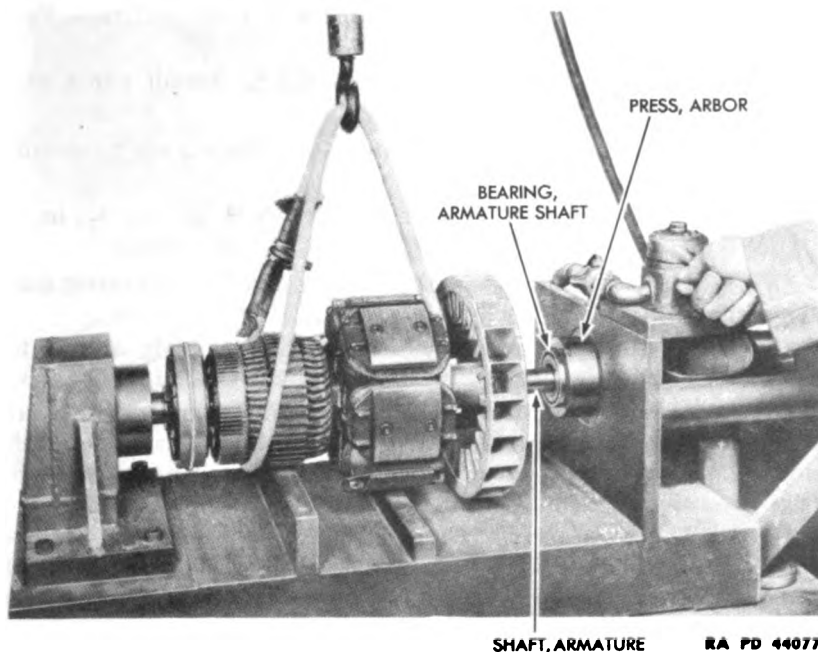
Pressing Armature Shaft Bearing on Shaft
